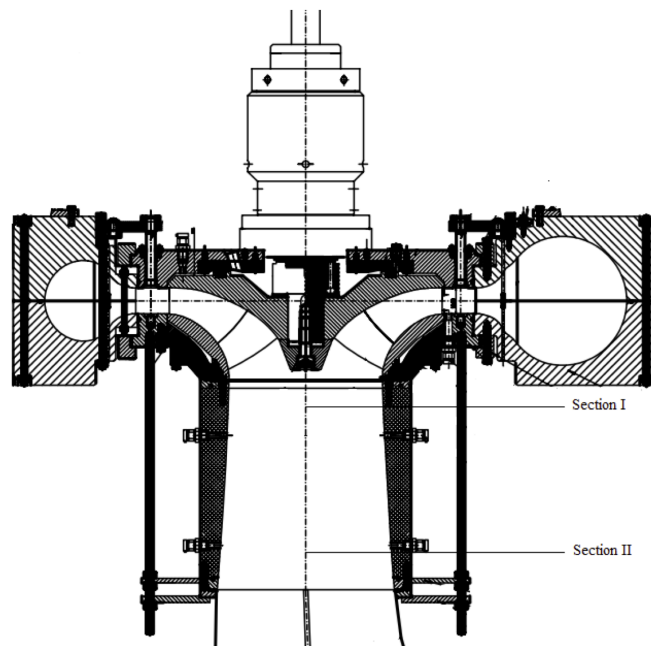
Measuring sections in the draft tube cone [15].
